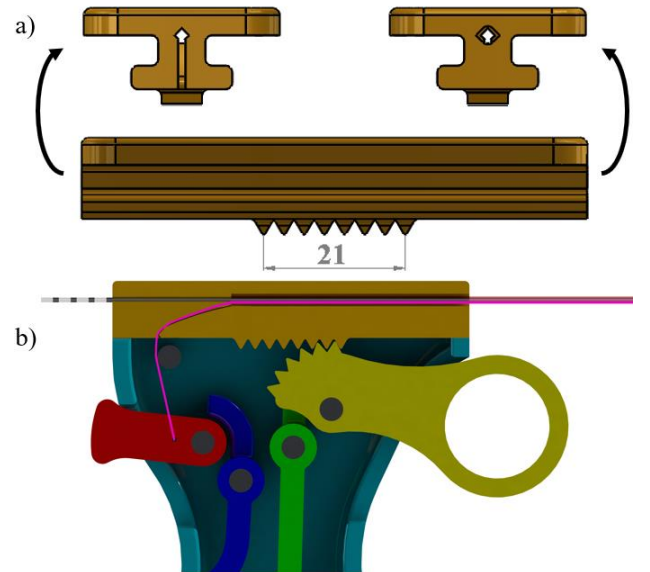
The shaft rack (a) with the rack length in mm and views of the electrode lead hole (left) and the introduction shaft hole (right), and a drawing of the cross-section of the handle with the cable in pink that runs through the rack part and attaches to the radius adjustment button (b).
